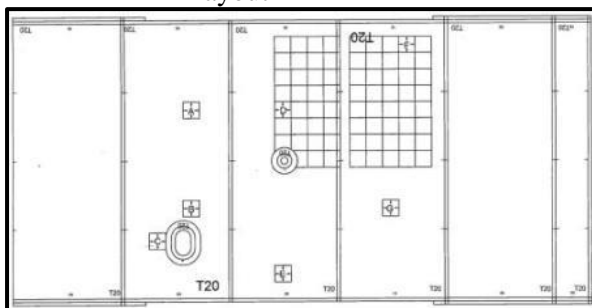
Tank 23 Measurement Panel Layout
